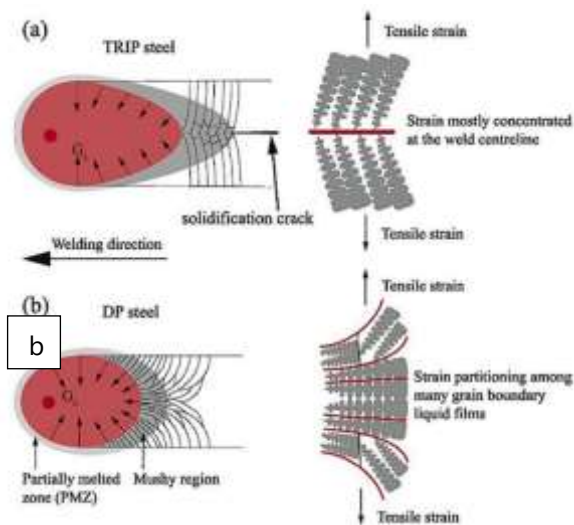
Weld pool shape on the surface of the metal being welded: a - teardrop-shaped; b - elliptical [21]
